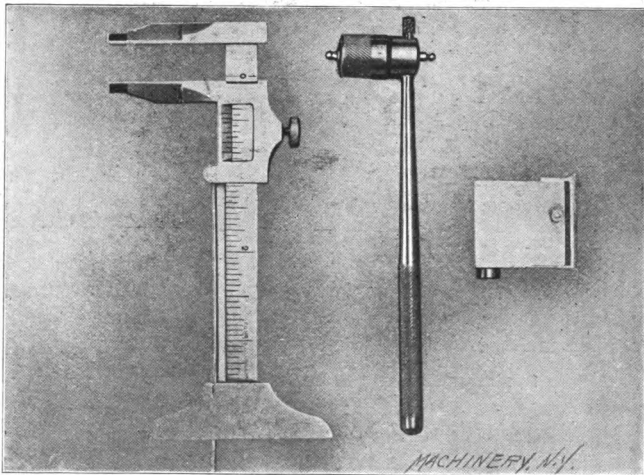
Vernier Caliper Depth Gage, Inside Micrometer, and Scribing Block
